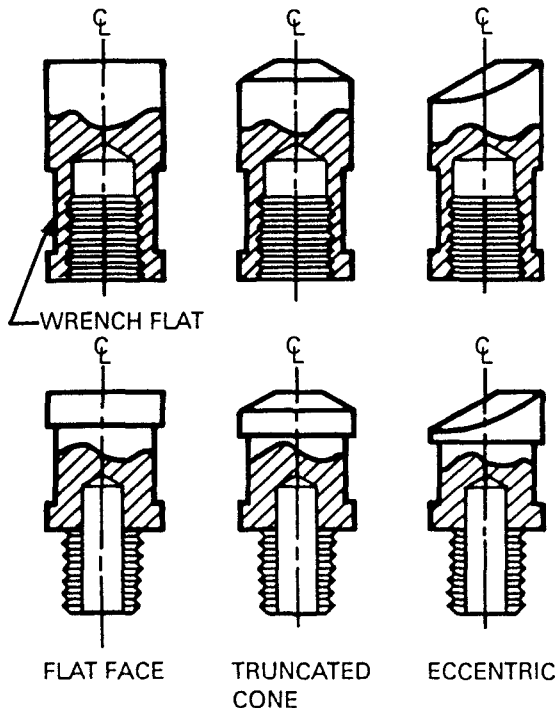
Typical Threaded Spot Welding Electrodes
